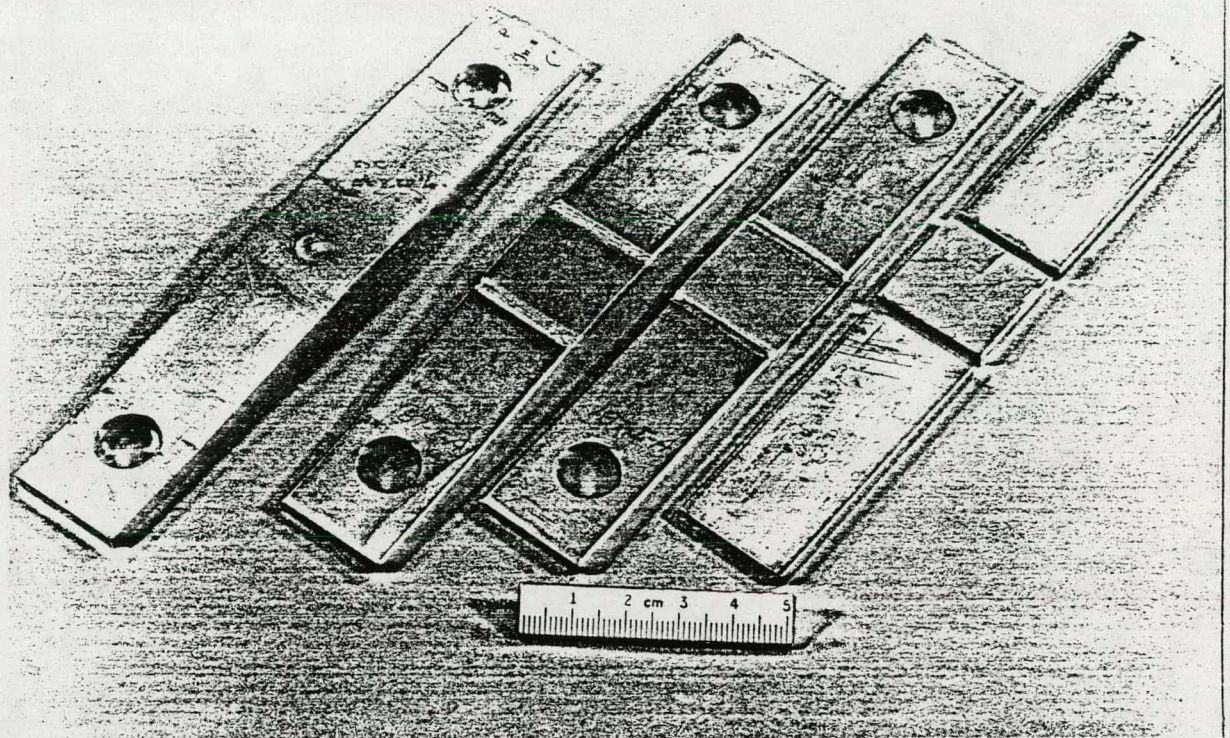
Spot Vareststraint Test Specimens. Standard specimen is at left with compound specimen shown (right to left) before assembly, after electron beam welding, and after testing.
